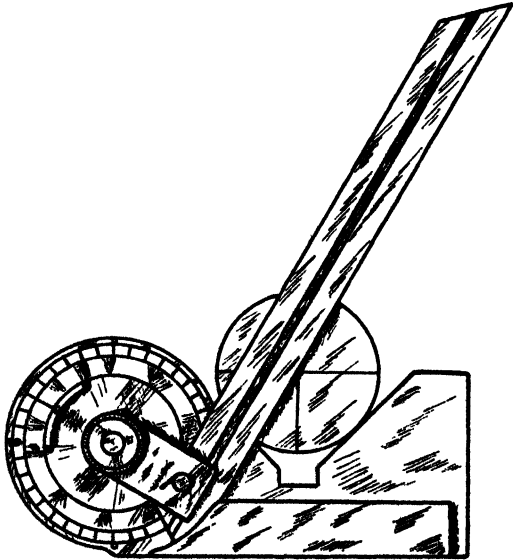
MARKING OUT A ROUND TUBE FOR RIVETS SET AT A GIVEN ANGLE FROM CENTRE LINE OF THE TUBE
